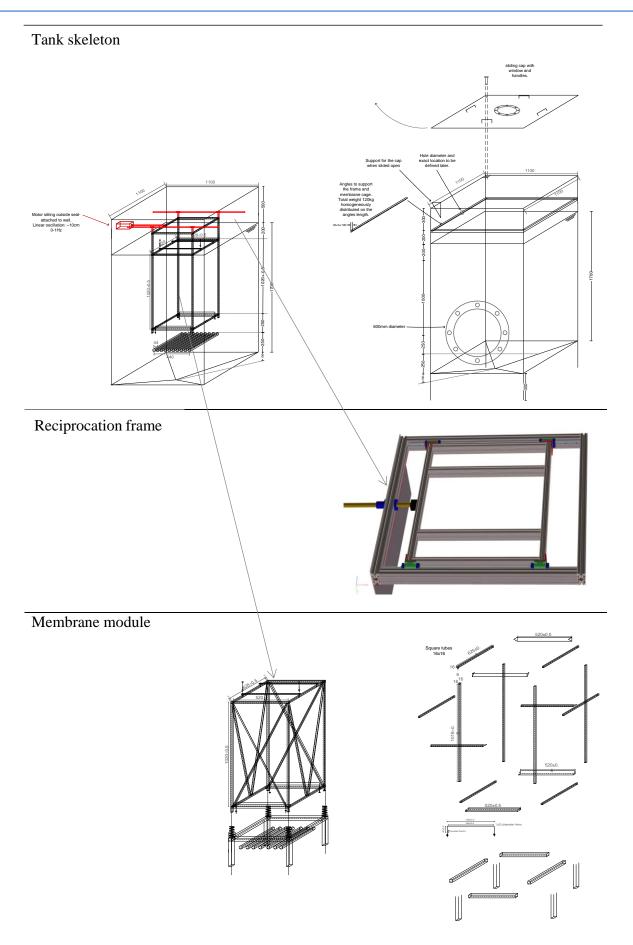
Concept and design drawings of the oscillatory AnMBR.
